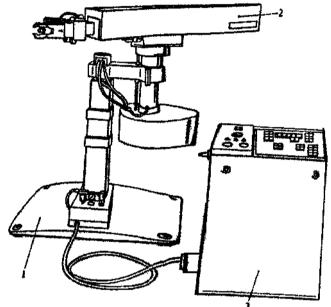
Pneumatically actuated robot: 1 – base with air supply unit; 2 – manipulator; 3 – control cabinet be done by the robot, is mounted on the outermost joint of the manipulator.
